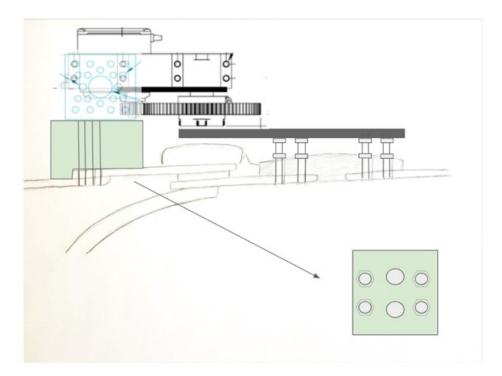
Sketch of the first design that shows how to attach the motor to the orthosis [40] [43].
